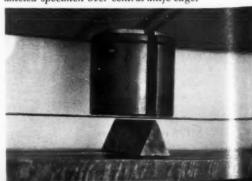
Experimental test setup to measure deflection of porcelain enameled specimen with modified loaded beam test fixture.
